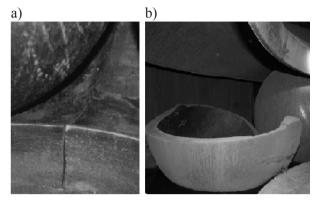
Milling assembly damage: a – race cracking, b – ball cracking [14]
